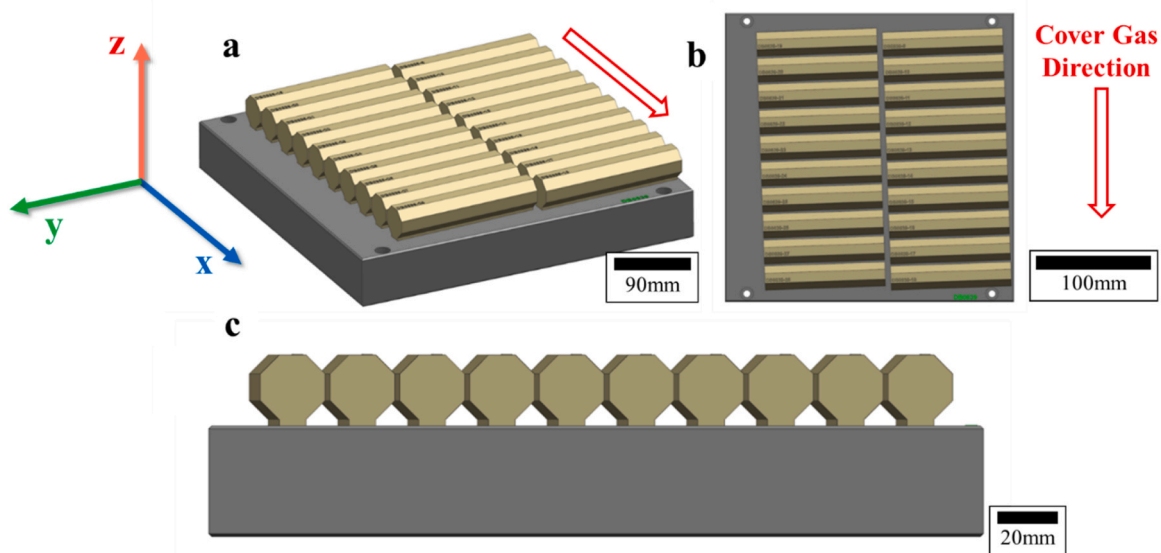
The build plate design containing the octahedral rods a) Isometric view b) Plan view c) Side view.
